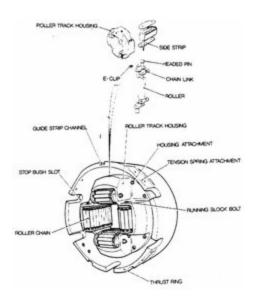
Mk 17T hose-drum-unit ejector assembly
